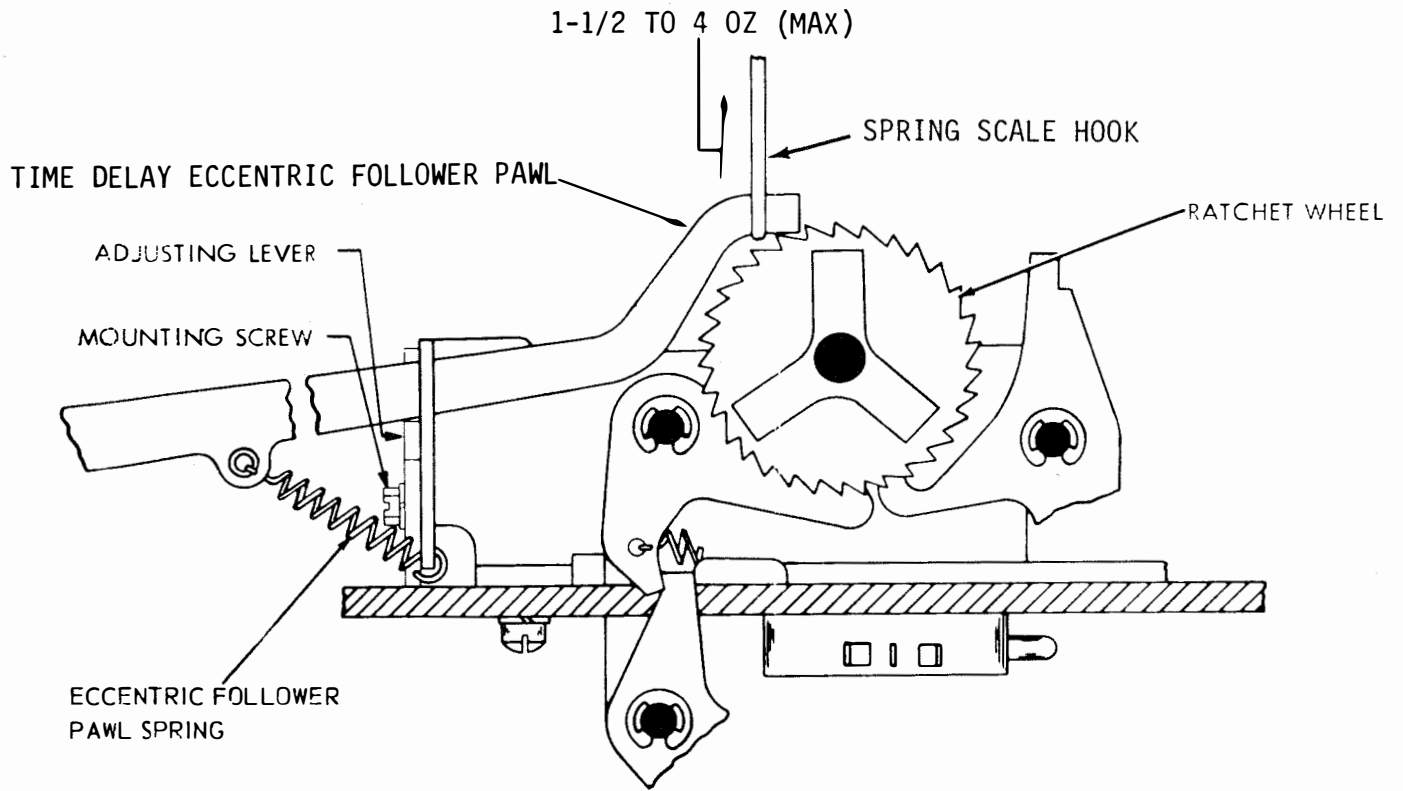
Eccentric Follower Pawl Spring and Time Delay Disabling Device
